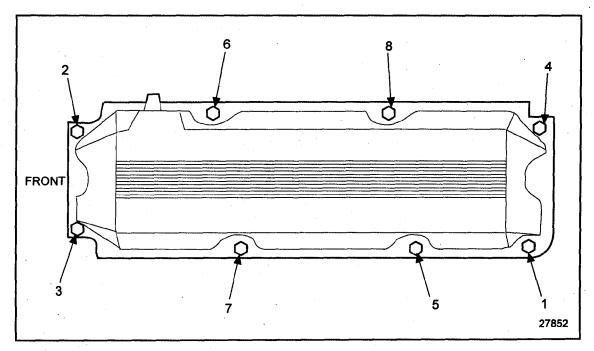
Rocker Cover Bolt Cap Tightening Sequence
